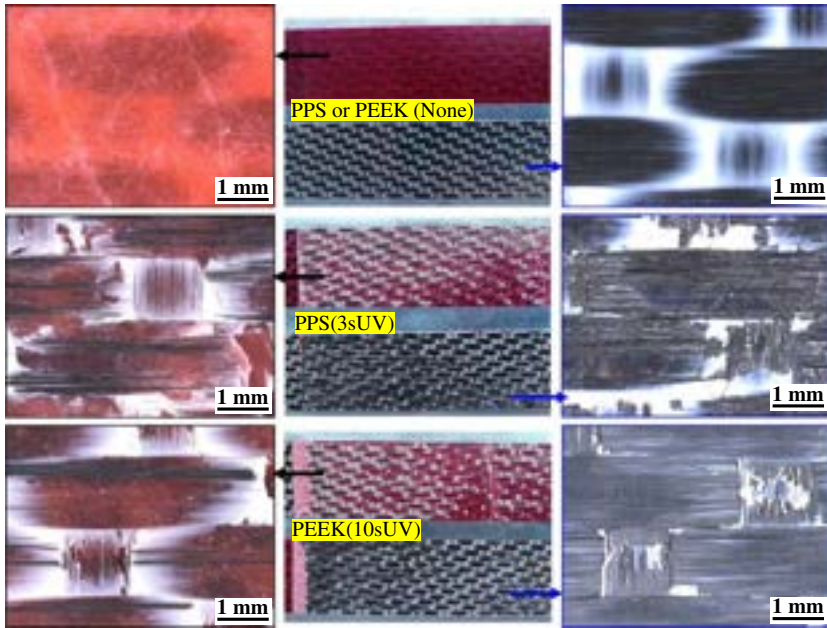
Fracture surfaces of the DCB specimens for showing significant damage of the UV-treated TPC substrates.
